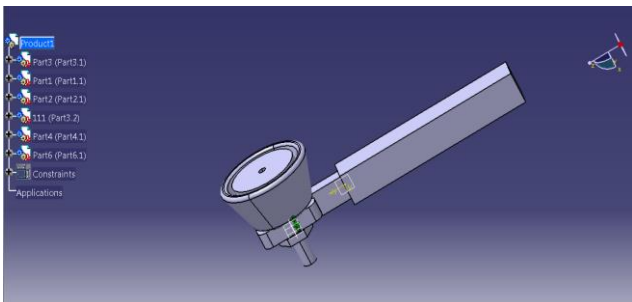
Representing the 3D assembled model of Roller Burnishing Tool
